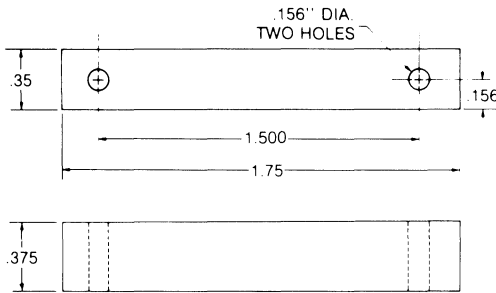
Adapter for Low Profile Package to Standard Hybrid Amplifier Test Fixtures
